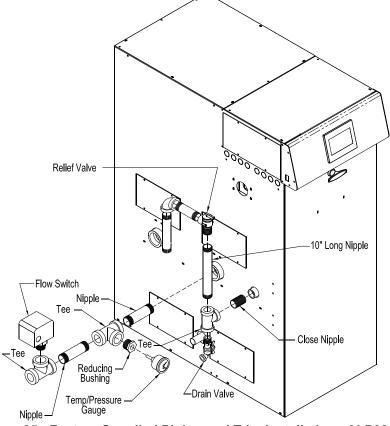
Factory Supplied Piping and Trim Installation - ALP399C
